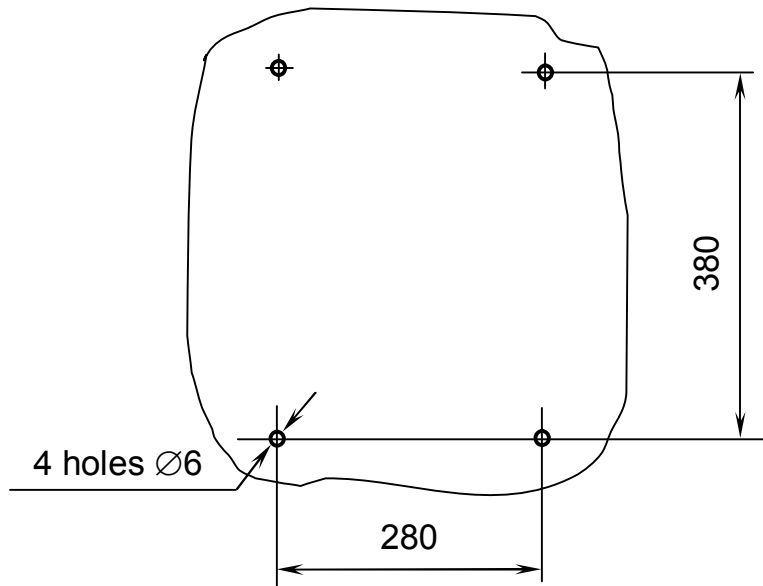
Arrangement of holes for securing the HP-1002 hydraulic panel
